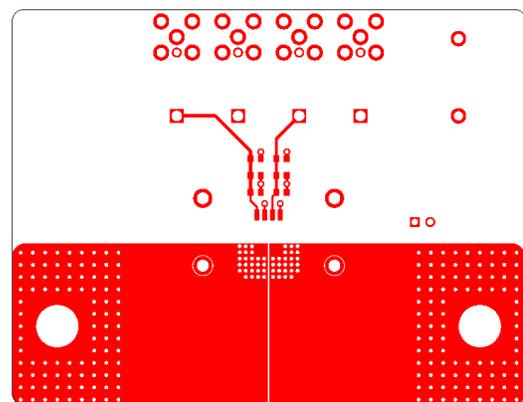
LC/LZ PCB Layout Reference View Without In-Pad Vias
